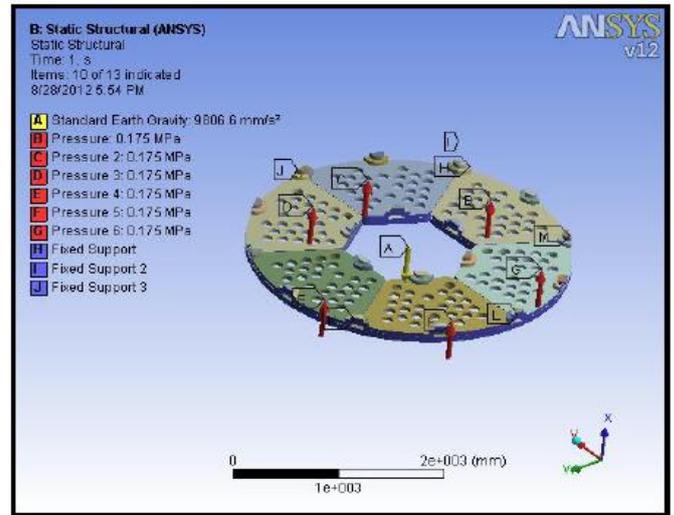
Boundary condition applied on Full Filter sheet Plate Assembly
